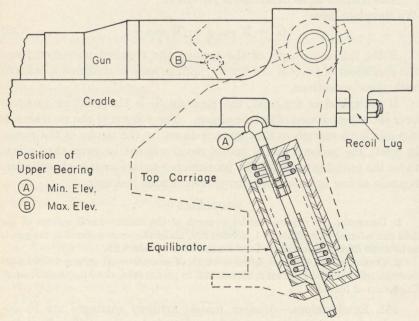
Equilibrator on 75-mm. Gun Mount M2.
